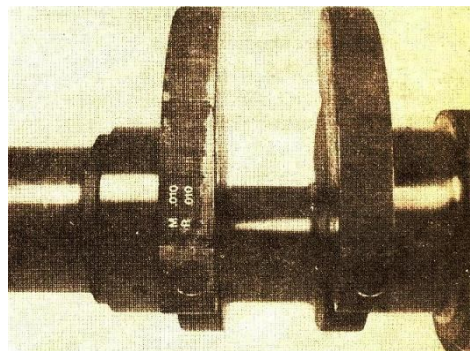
Undersize main and connecting rod marking on the crankshaft
